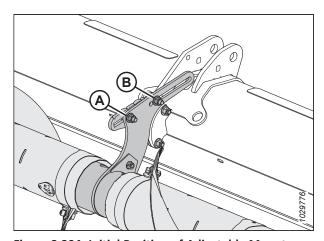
Initial Position of Adjustable Mounts – Two-Piece Auger
